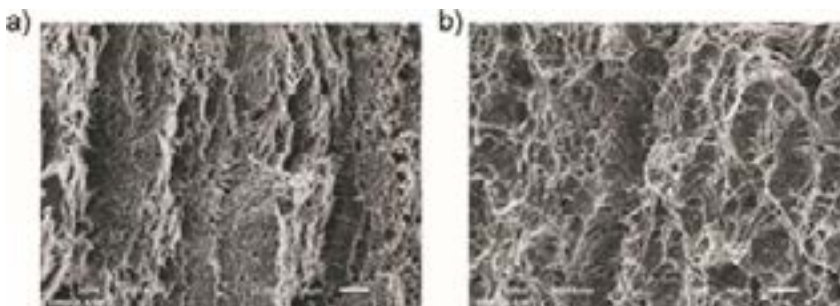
Fractographic test results concerning the test specimens made in steel S960QL: after the tensile test (a) and after the impact test (b); (SEM)
